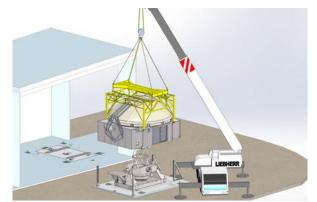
3D-CAD drawing of the UTE being integrated with UTM
